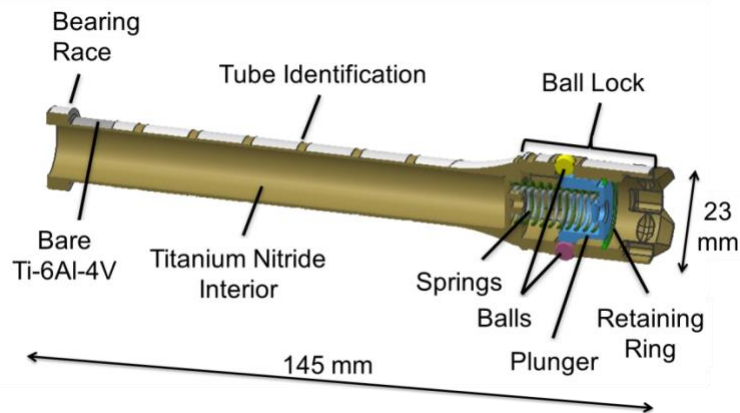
Cross section of empty Ti-6Al-4V flight sample tube design. Components include the bearing race, tube identification, and ball lock mechanism.
